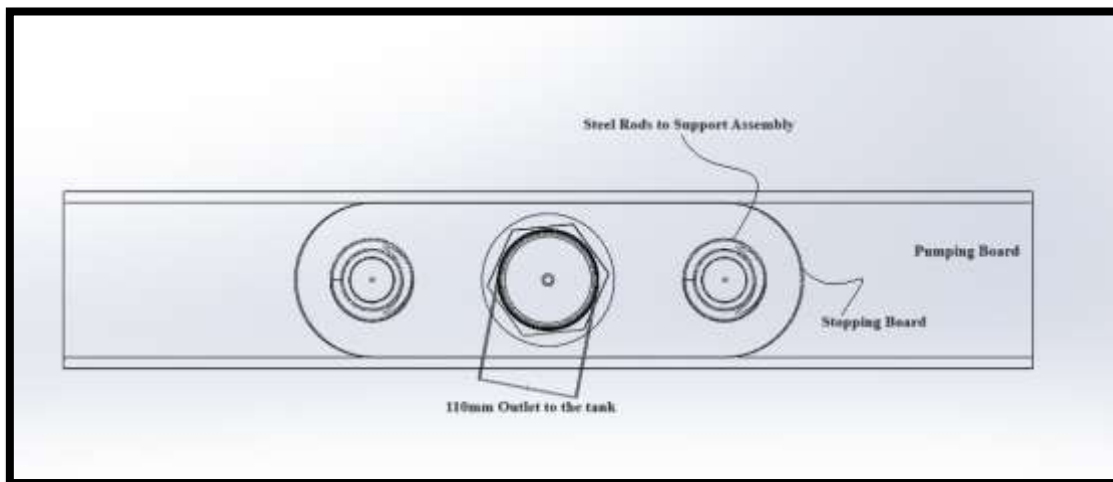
Plan view of the springboard mechanism (Source: Solidworks 2023)
